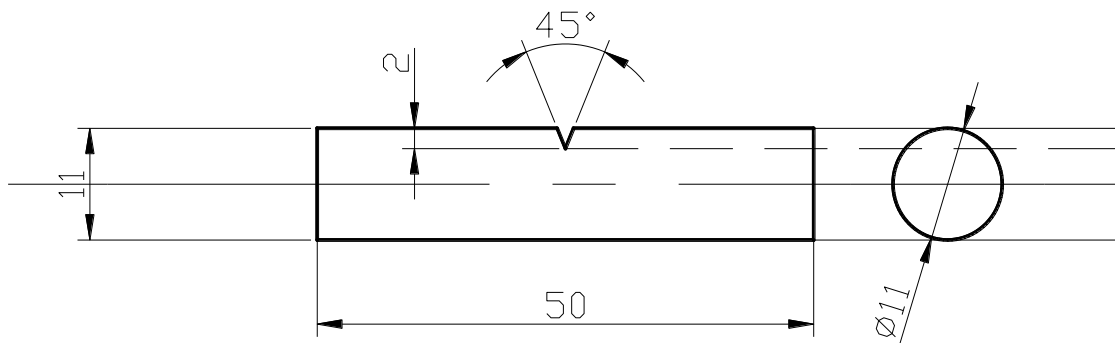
Standard Impact Test Specimen(Dimensions in mm).
